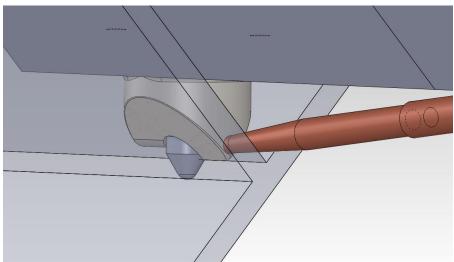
3D-view of Shoulder Holder, Shoulder, Probe and Wire Guide together with the weld piece (transparent)
